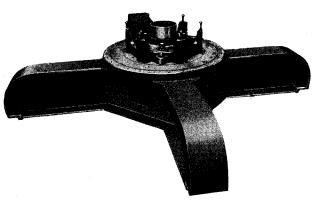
UPPER BRACKET FOR SMALL WATER WHEEL GENERATOR.
